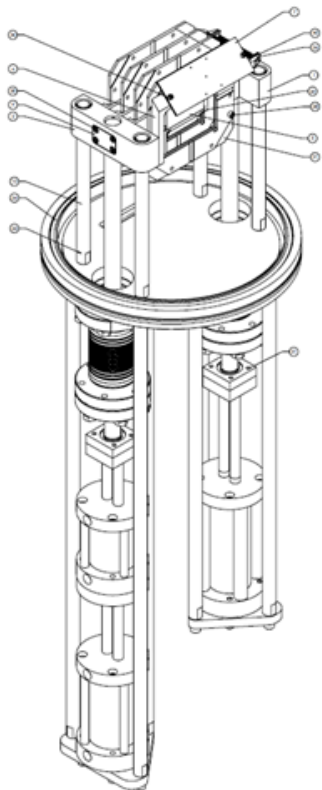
CAD drawing of Si-Be segmented target at the NSCL.
